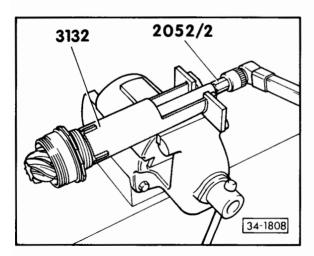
Unscrewing and tightening slotted nut (On final drive with selectable 4WD)
